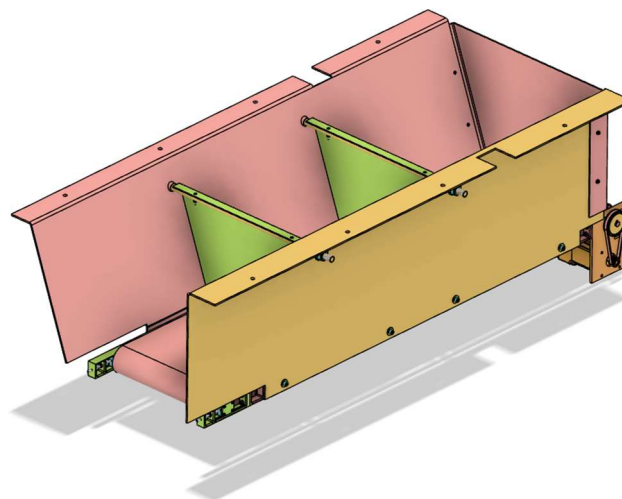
First conveyor ready to be mounted on the principal structure
